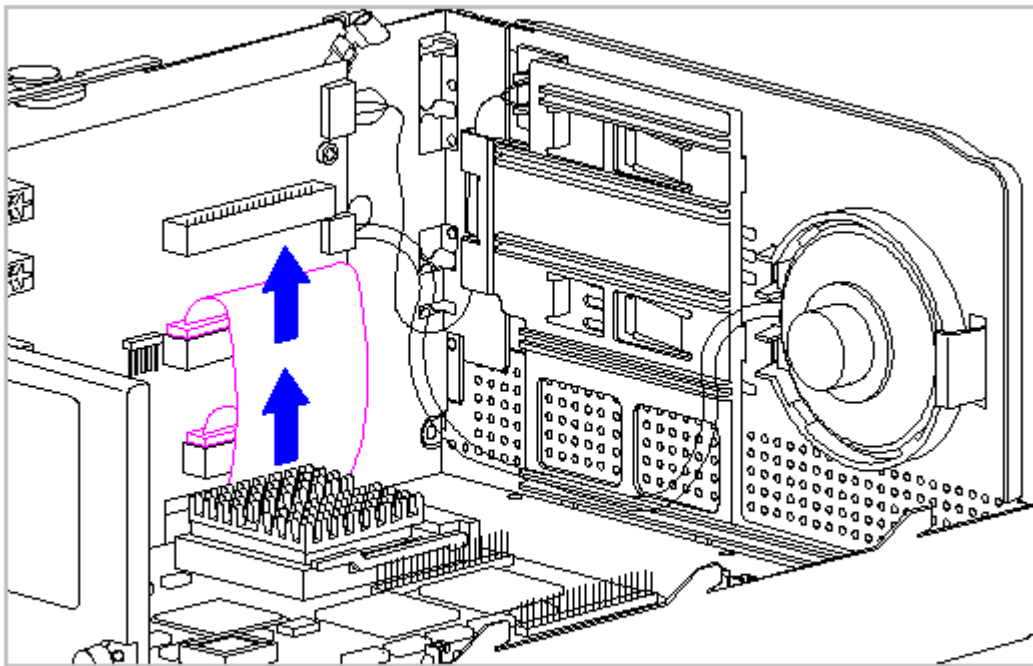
Disconnecting the Drive Cables from the Backplane Board
